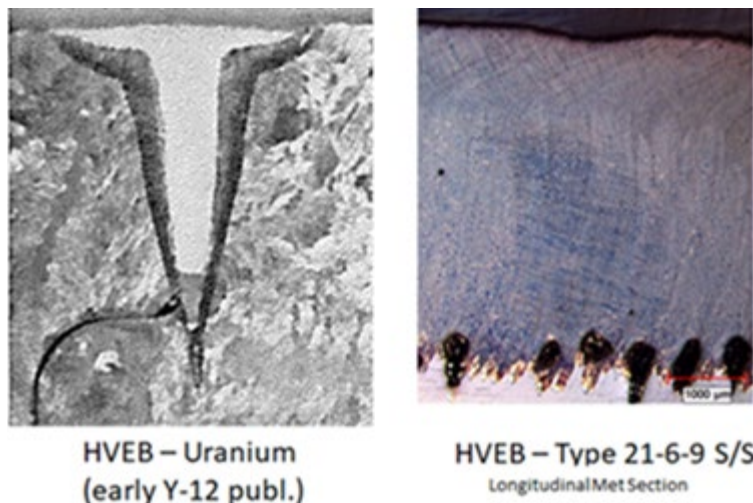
Two examples of the cold-shut type voids often seen in deep penetration welds produced by High Voltage EB machines when welding in vacuum.
